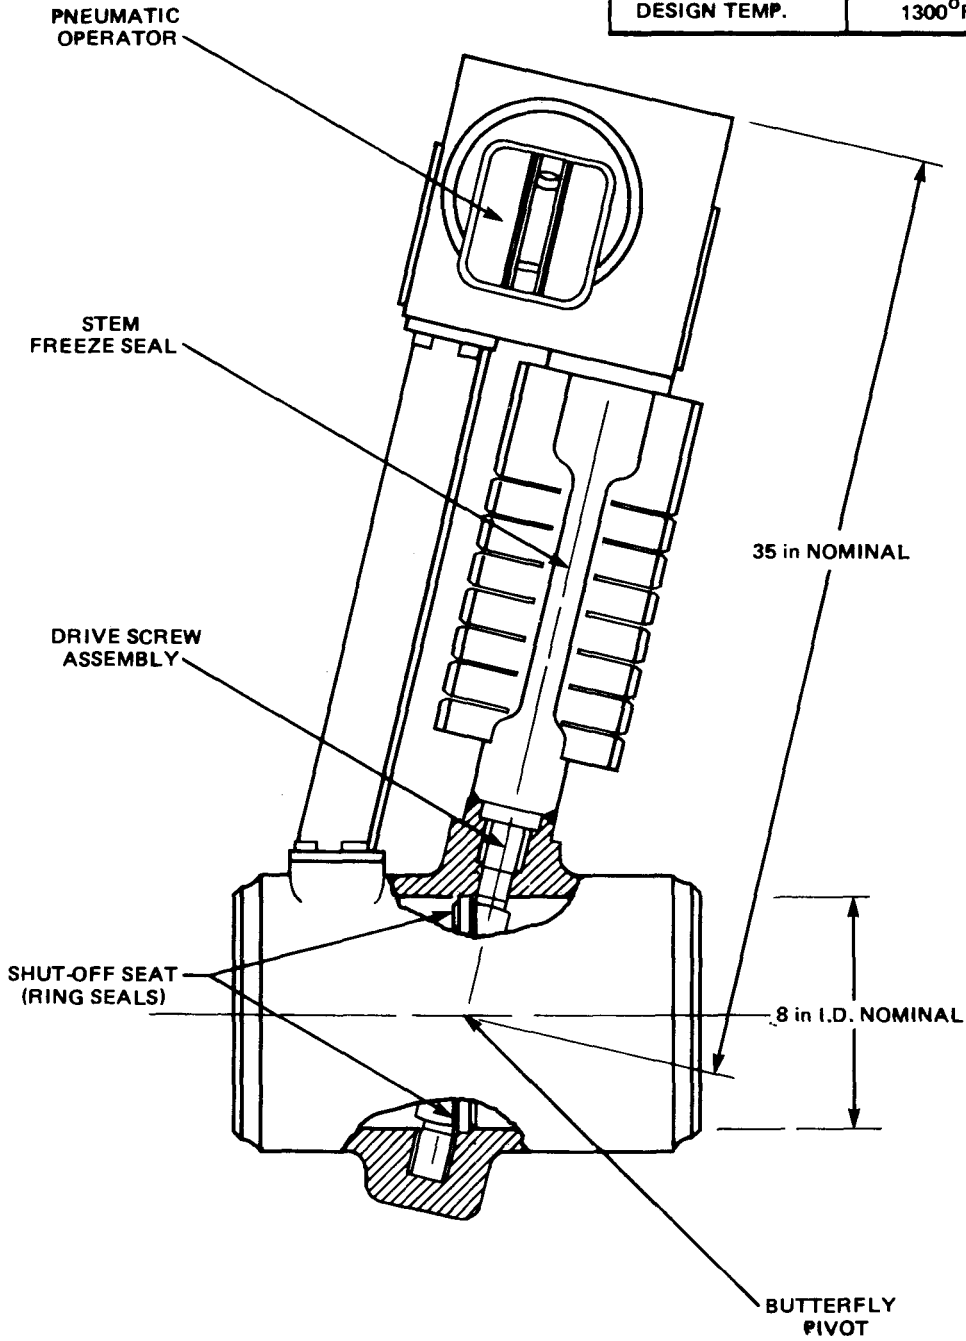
Eight-Inch Sodium Throttle Valve
